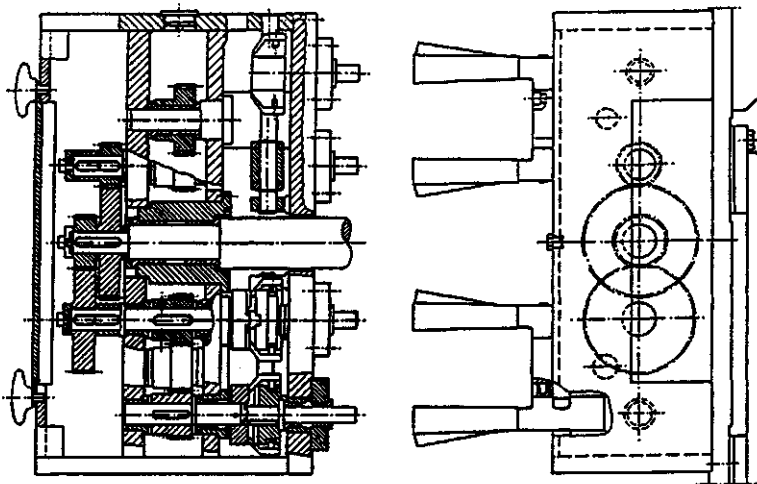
Bicomponent spinning pump drive gearbox with 4 change gears, adjustable within the range of 85 : 15 . . . 50 : 50 . . . 15 : 85 in small steps; with mechanical clutches [24]
